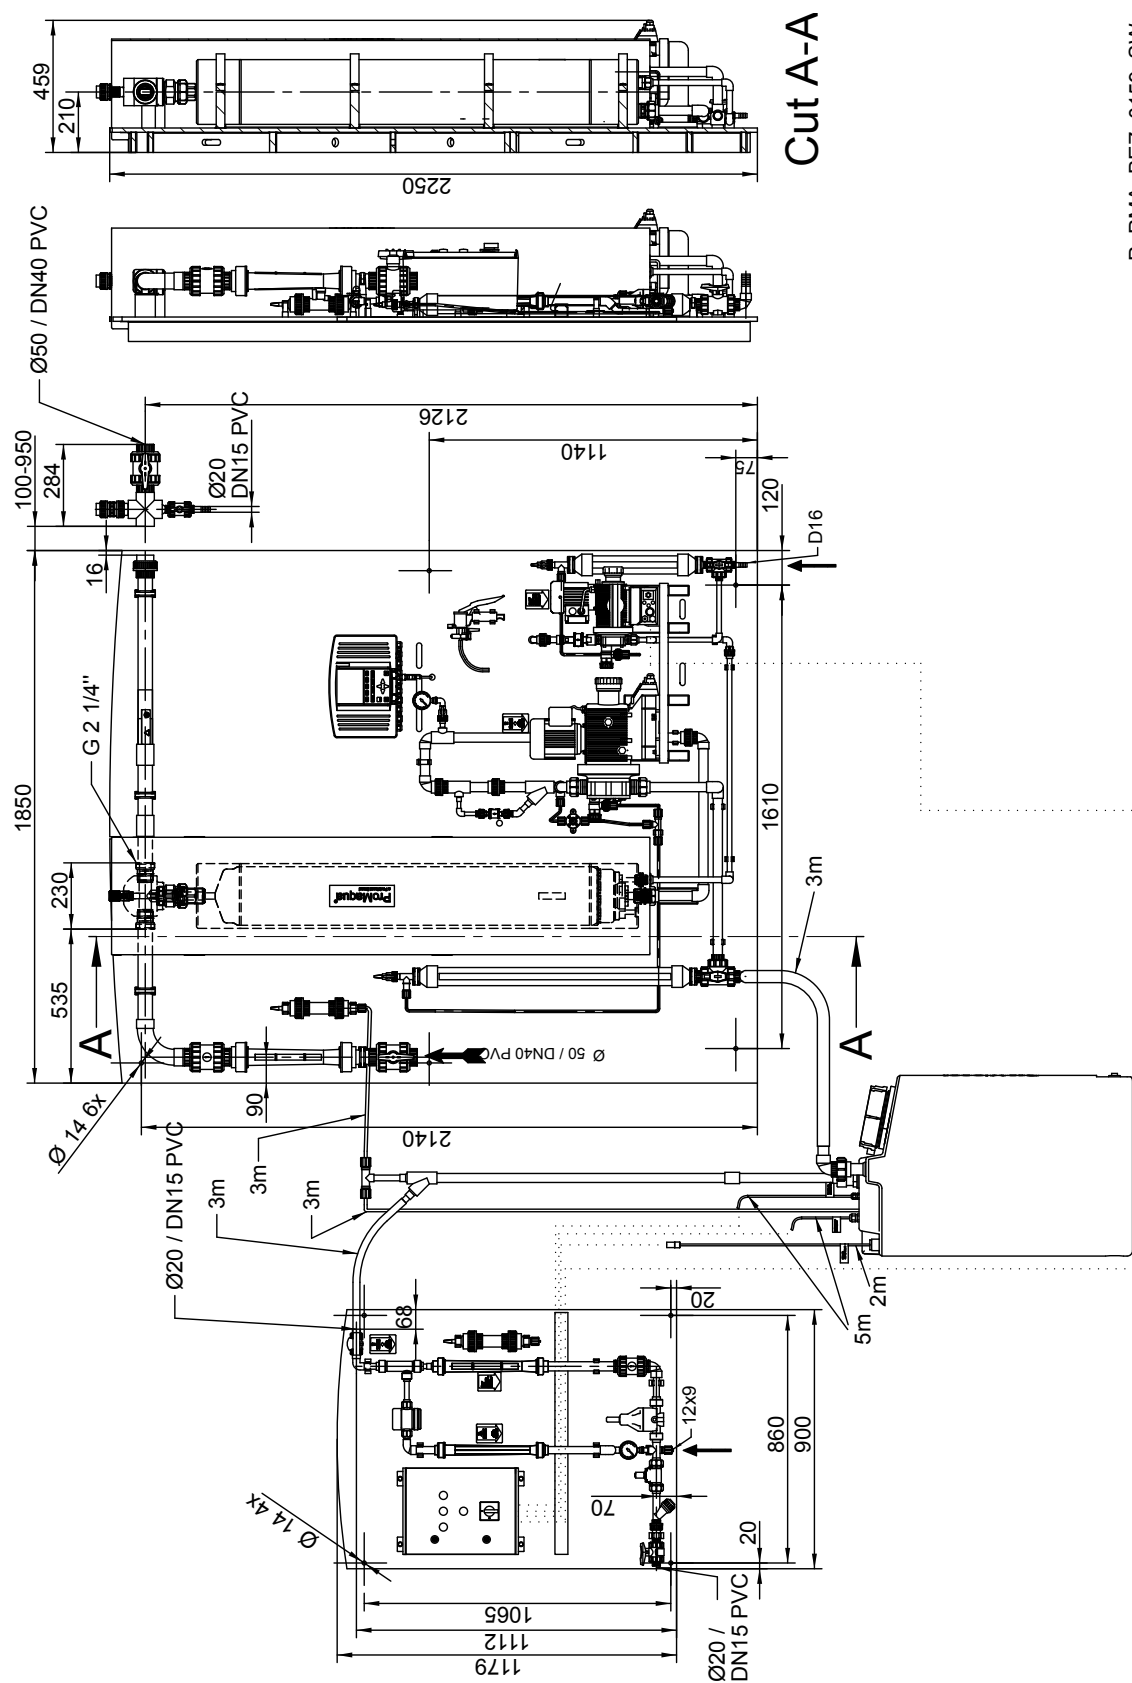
Dimension sheet CDKc 7300 ... 12000 - dimensions in mm
